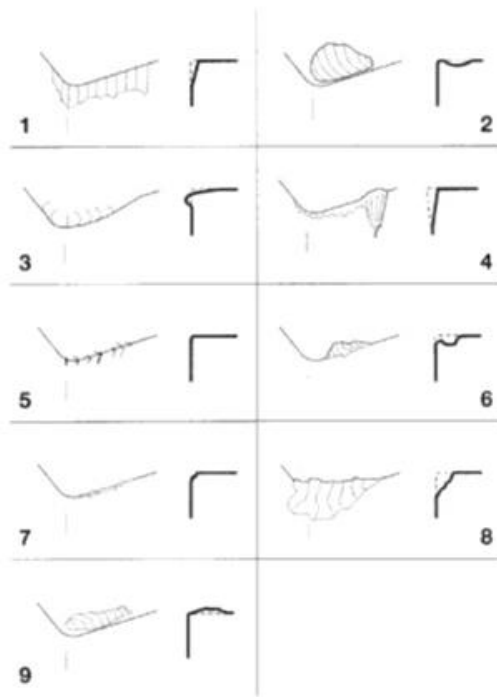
Cutting tool wear classification of different wear factors: 1 – side wear, 2 – crater wear, 3 – plastic deformation, 4 – carving wear, 5 – thermal cracking, 6 - mechanical fatigue cracking, 7 – shavings, 8 – crack, 9 – ridge formation [14].
